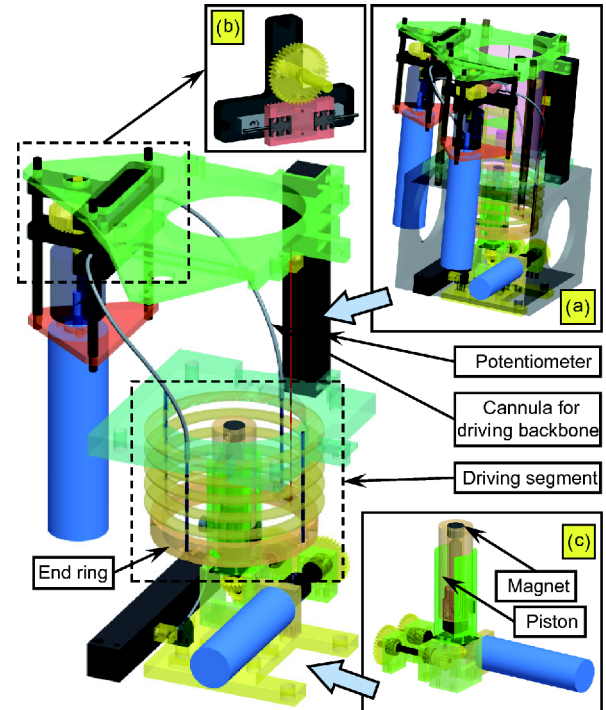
(Color online) The SMARLT's actuation unit. (a) The entire assembly; (b) the backbone driving assembly; (c) the gripper driving assembly.
